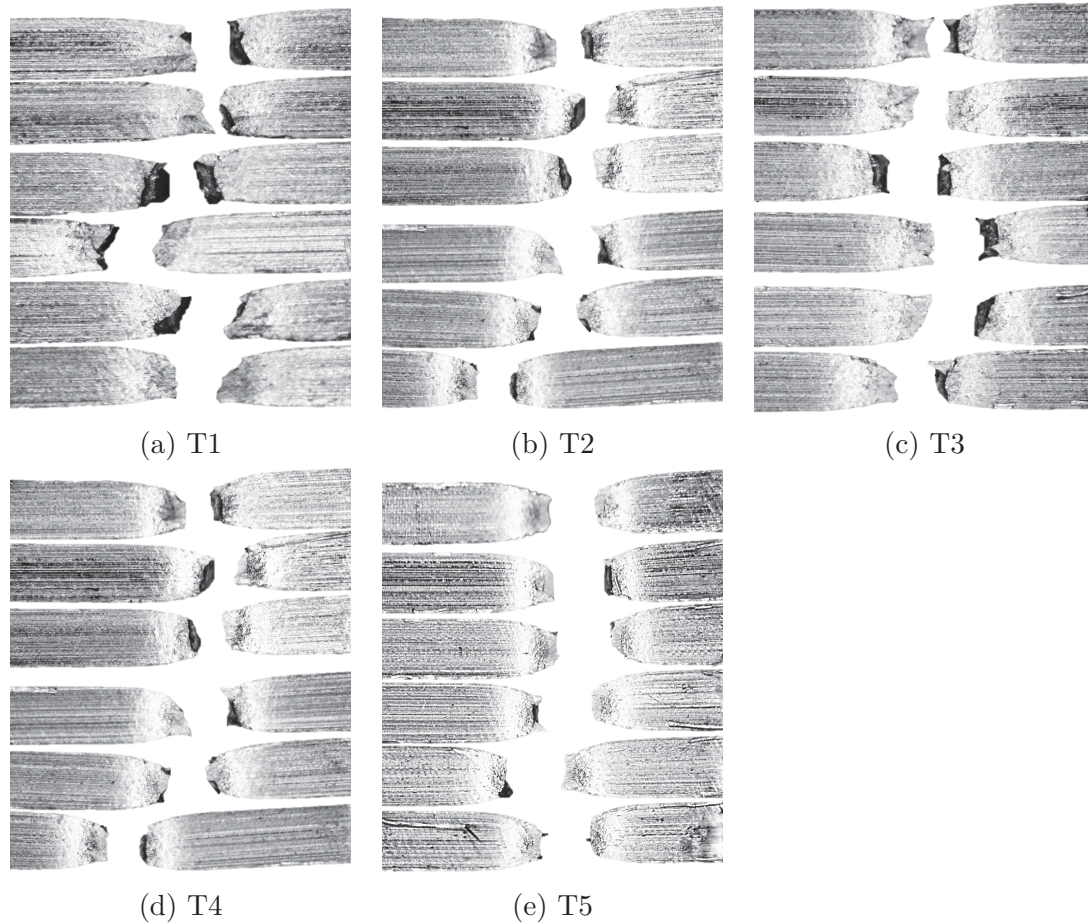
Fracture surfaces of the micro-sized samples T1 - T5 after tensile tests. The in-plane width of the samples is 1.0 mm whereby the top of the pictures represents the tube outer surface.
